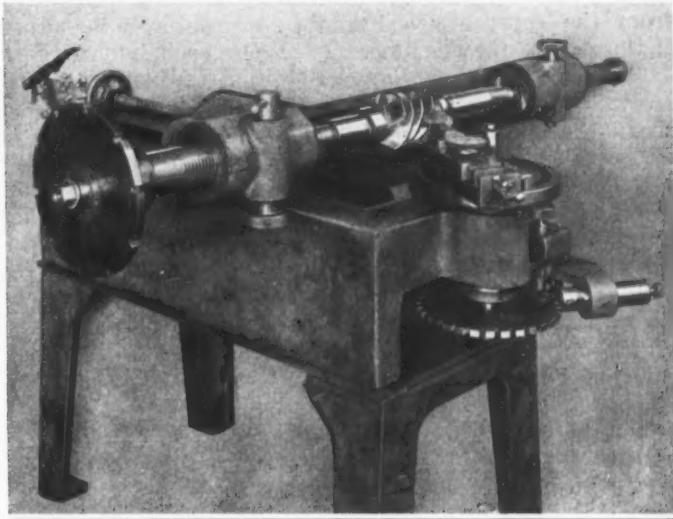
Testing Machine for Checking Lead, Pressure Angle, and Spacing of Worm Threads
